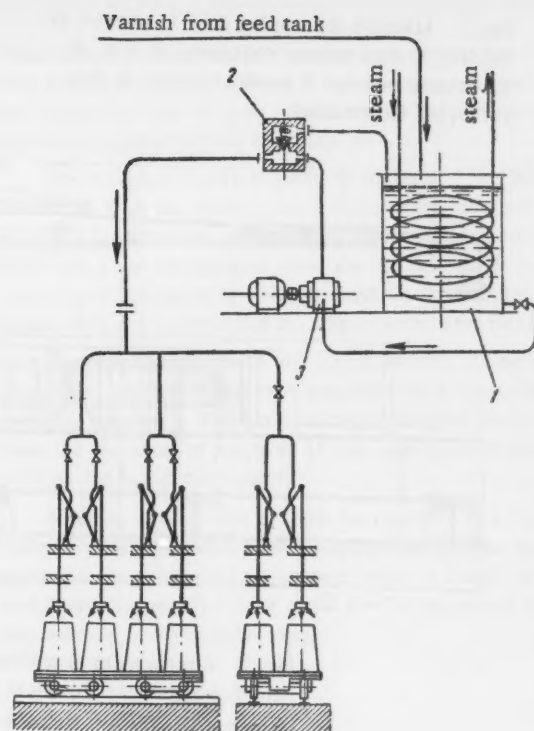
Apparatus for lubricating molds: 1) varnish tank; 2) by-pass valve; 3) gear pump.
